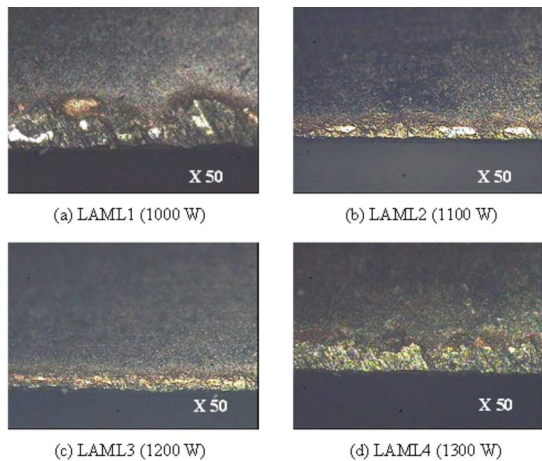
Flank wear of the TiAlN coated carbide tools after 20 mm cutting of LAML
